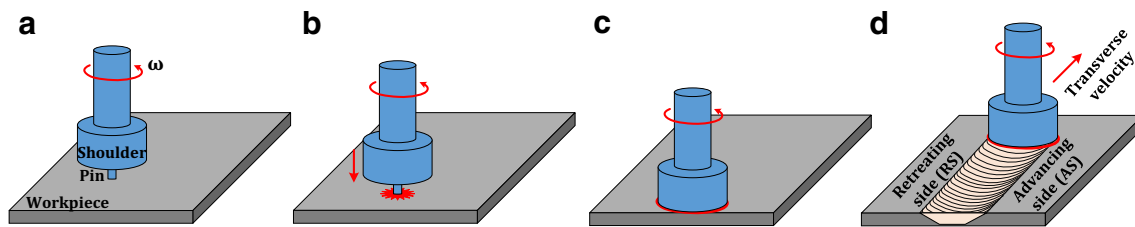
Schematic of the FSP process steps: a nonconsumable tool with complex features rotates; b the rotational tool is plunged into the workpiece until the tool shoulder touches the work material; c the tool
